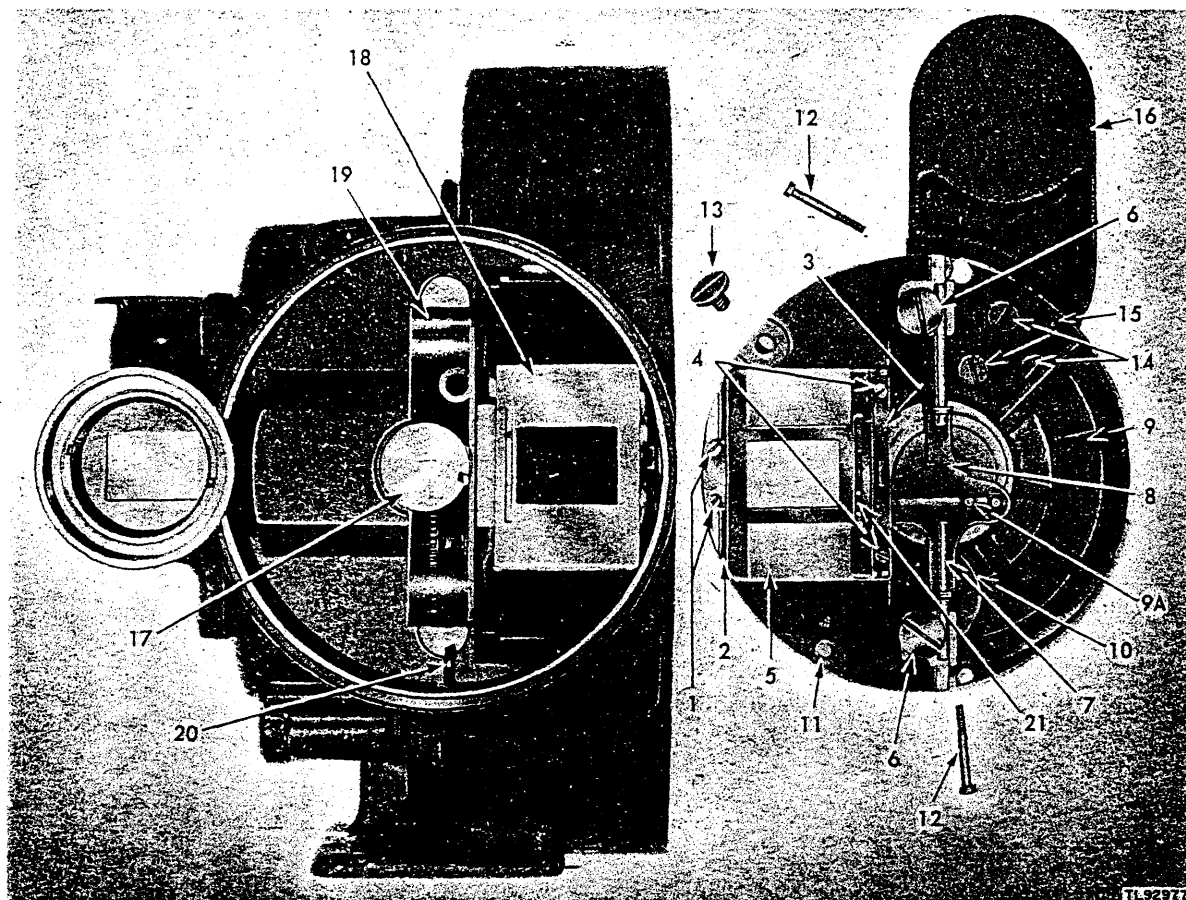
Disassembly, winding gears and housing, with geared winding crank, Camera PH-330-H.
